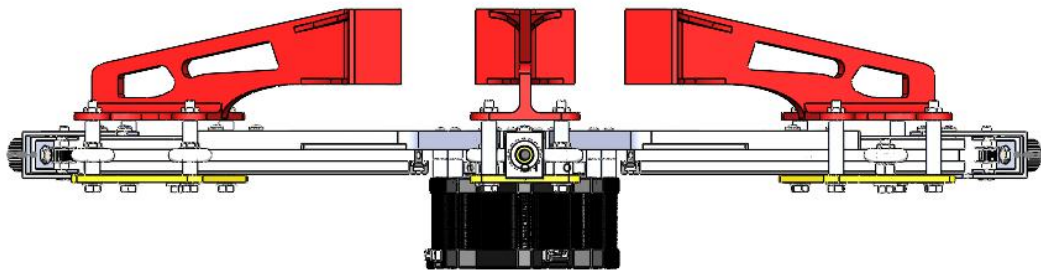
Linear Actuator Assembly of Body Magazines (Right View)
